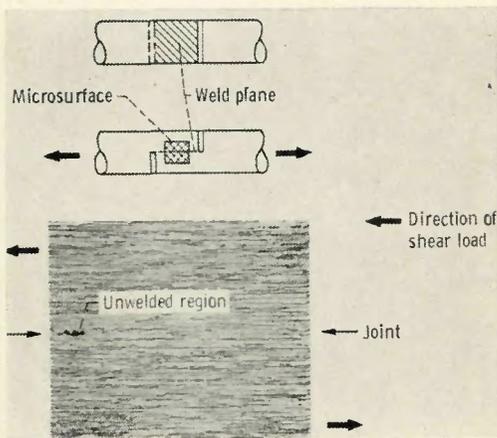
Hot-isostatic-pressure-welded lap joint in 1/2 in. (12.7 mm) diameter TD-nickel bar. Original faying surfaces were milled and joint was heat treated at 2000° F (1093° C) for 100 hr after welding. Etchant: 92 milliliters HCl, 3 milliliters HNO₃, 5 milliliters H₂SO₄ (swab). X500 (reduced 10% on reproduction)
